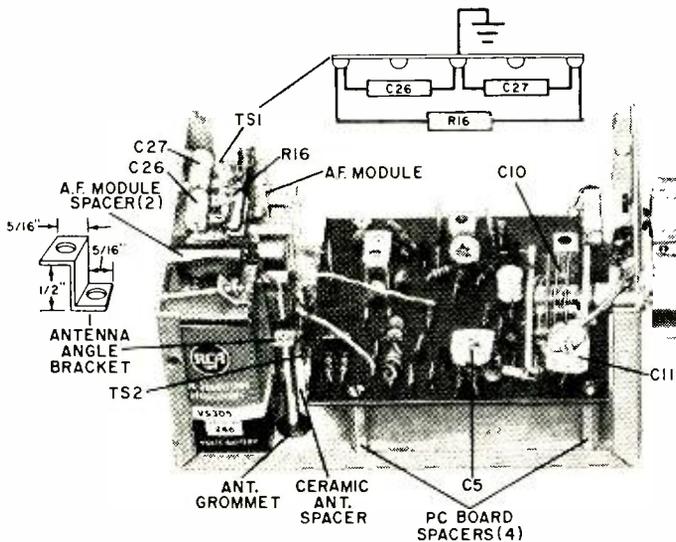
Shown at left are construction details for the antenna mounting bracket and the parts arrangement on terminal strip TS1. Battery is held in place by a metal clamp.
